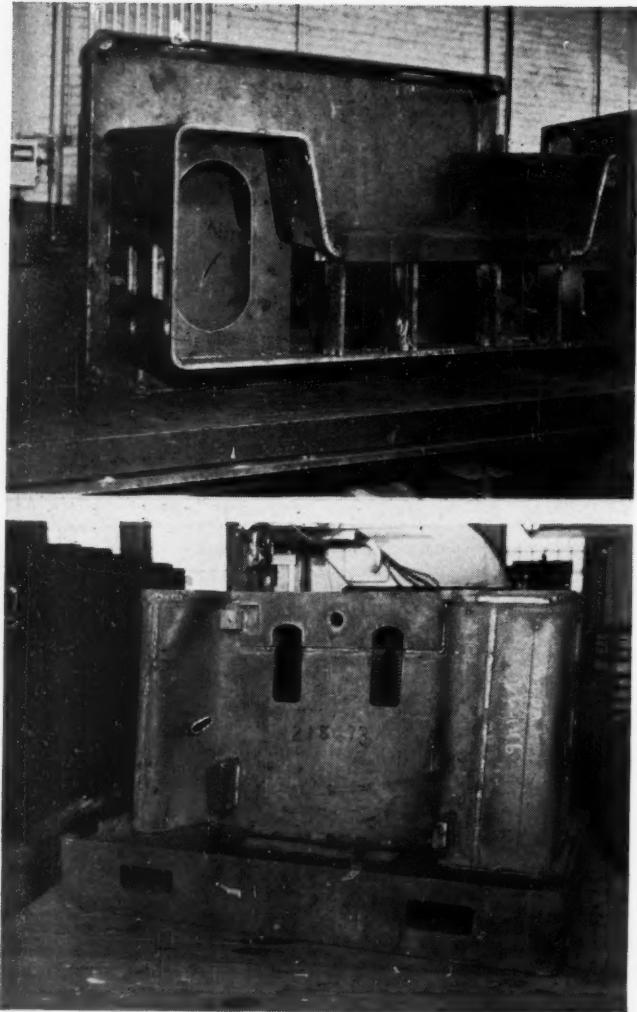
Top—View looking down into centerless grinder bed, showing internal ribbing. Castings and welded steel are combined. Fig. 2—Above—Front view of completed centerless grinder bed. Smoothness of joints is notable.
